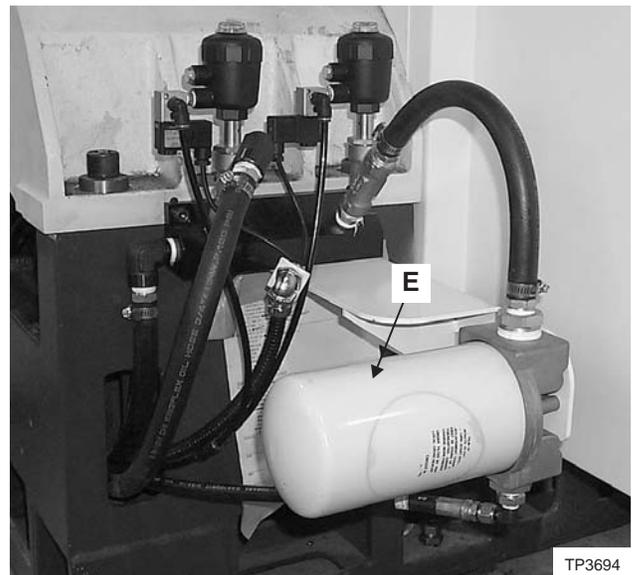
Thru-Spindle Spin-On Canister Filter
